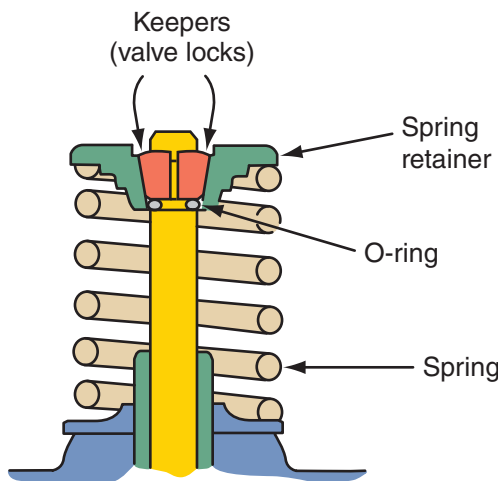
Valve assembly with spring, retainer, seals, and keepers.
